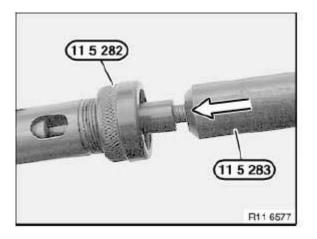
Pressing Valve Keys Into Special Tool 11 5 282 With Special Tool 11 5 283 Courtesy of BMW OF NORTH AMERICA, INC.
